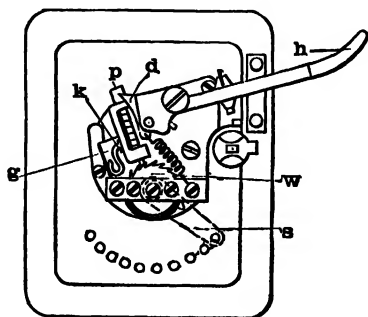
Details of the Automatic Attachment in the Wall Set Shown in Fig. 111
